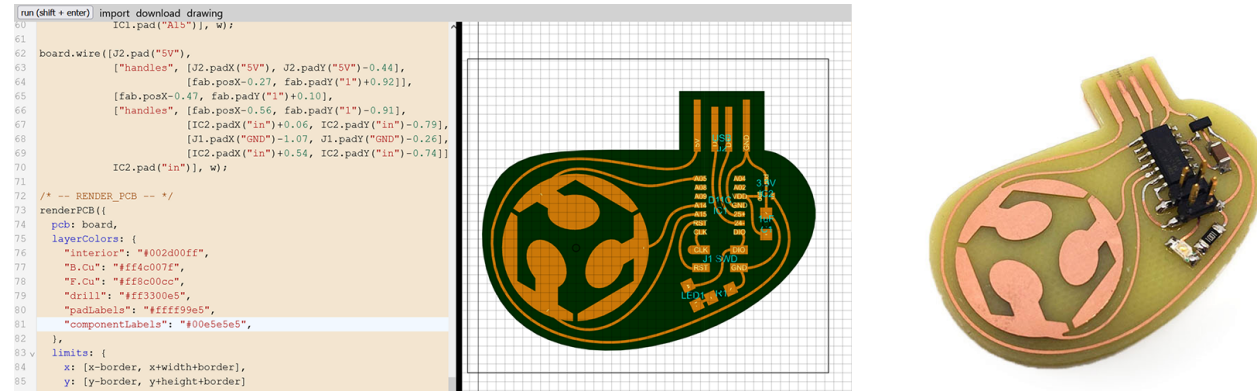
Left: example board design using SVG insertion and Bezier splines wires. Right: resulting board milled on a desktop CNC milling machine.
